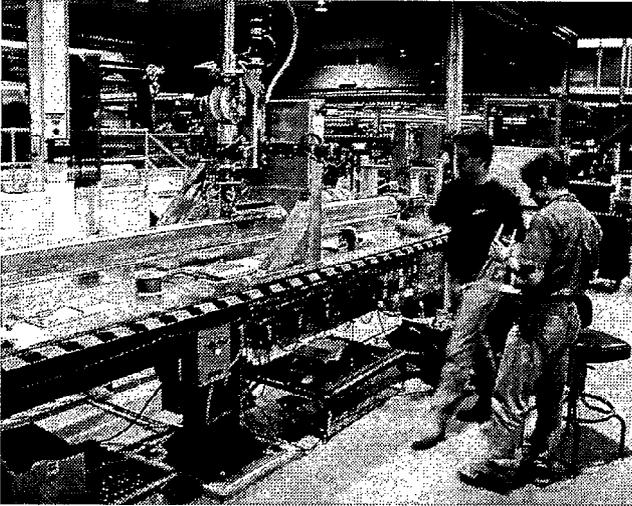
A GO coil layer being laid down via our computer controlled winding machine. After winding, this layer had its spaces epoxy and G10 filled, was wrapped with s-glass and cured before winding the next layer.
